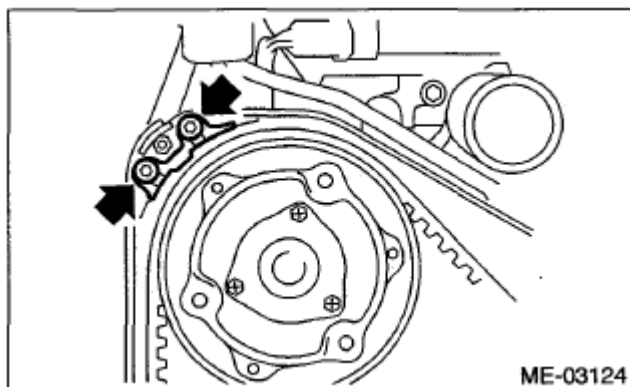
Locating Timing Belt Guide Mounting Bolts (1 Of 3)
